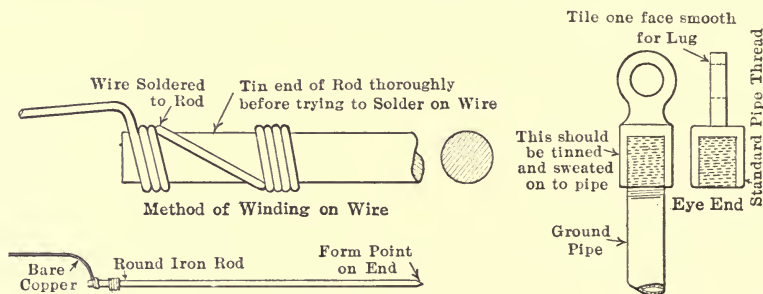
WROUGHT-IRON GROUND ROD. FIG. 2.—COMMERCIAL "EYE-END" ON PIPE.
